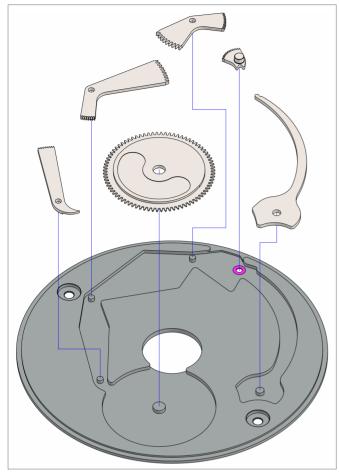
Exploded view of the retrograde indicator mechanism assembly.
